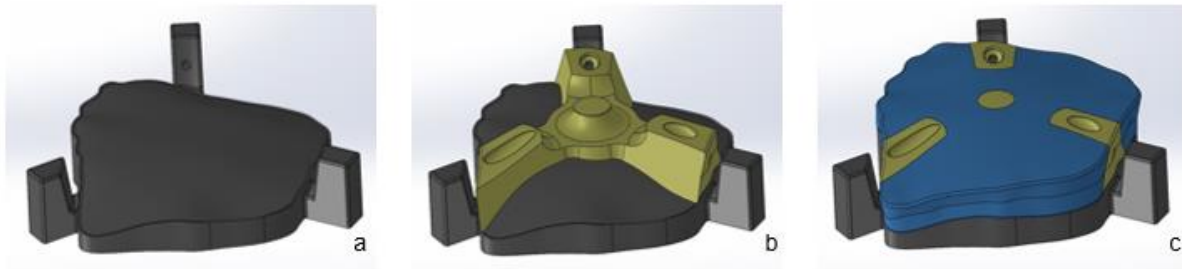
(a) Support structure; (b) Support and bearing structure; (c) Support, bearing and filling structure
